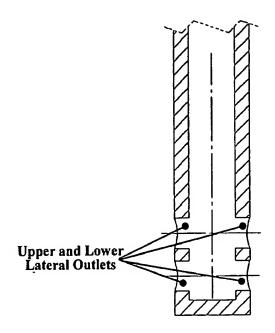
Section View of a Casting Nozzle with Upper and Lower Lateral Outlets
